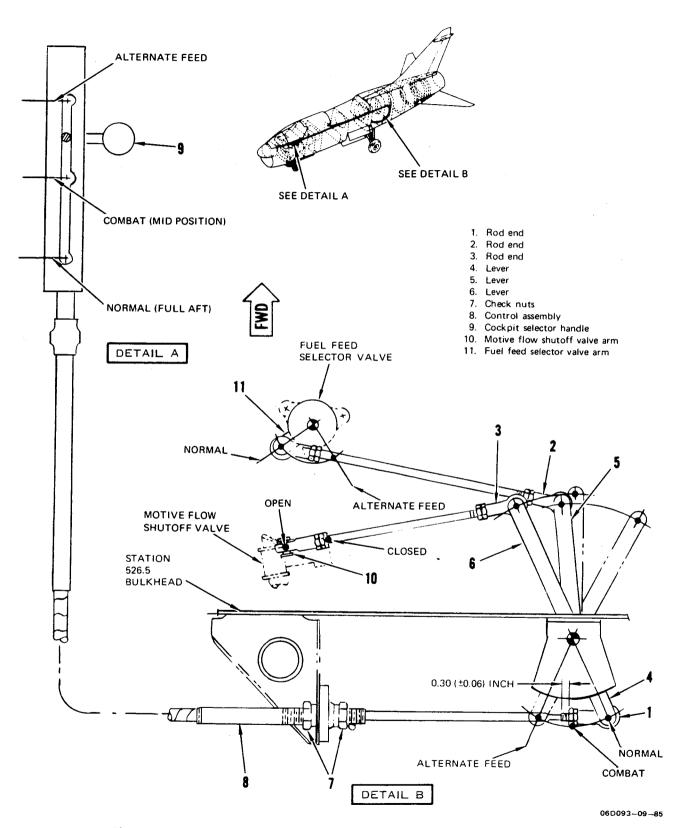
Rigging; Alternate Fuel Feed Push-Pull Control Assembly
